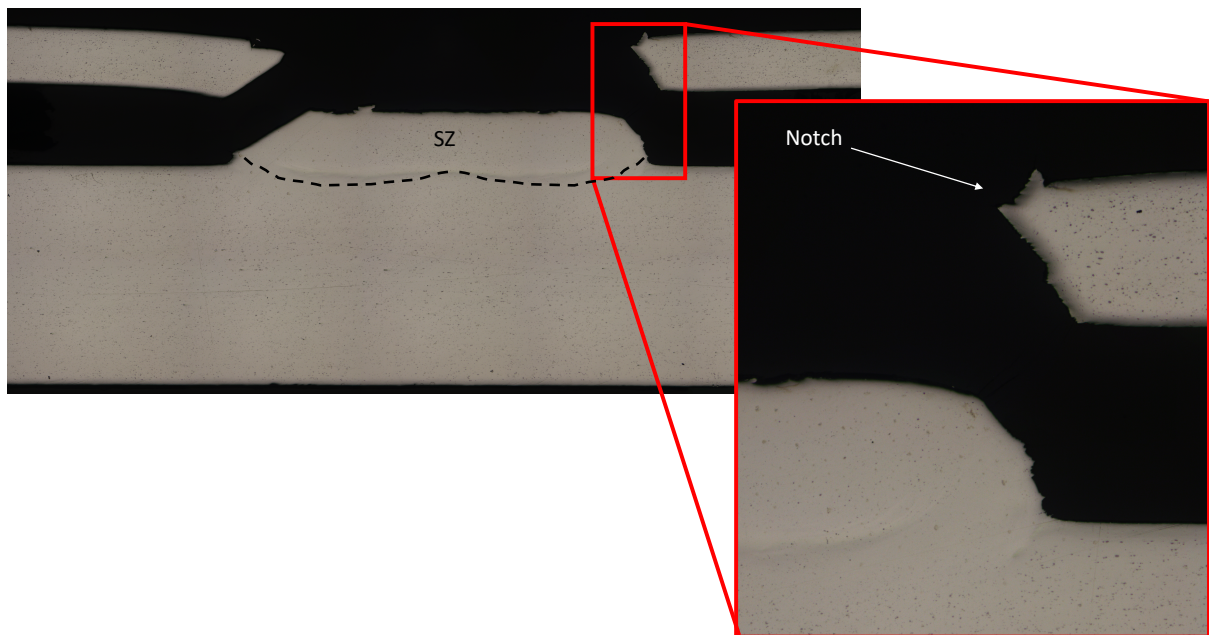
Pullout fracture, in which the notch is highlighted atop the fracture path.
